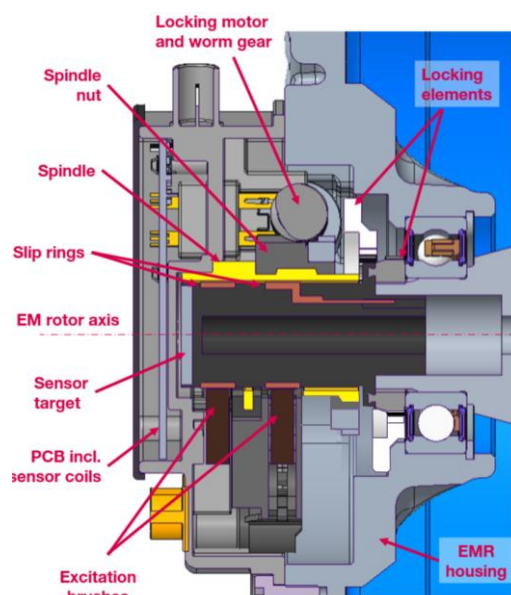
Cross-section of the 3-in-1 rotor lock module integrated into the free end of an EESM
